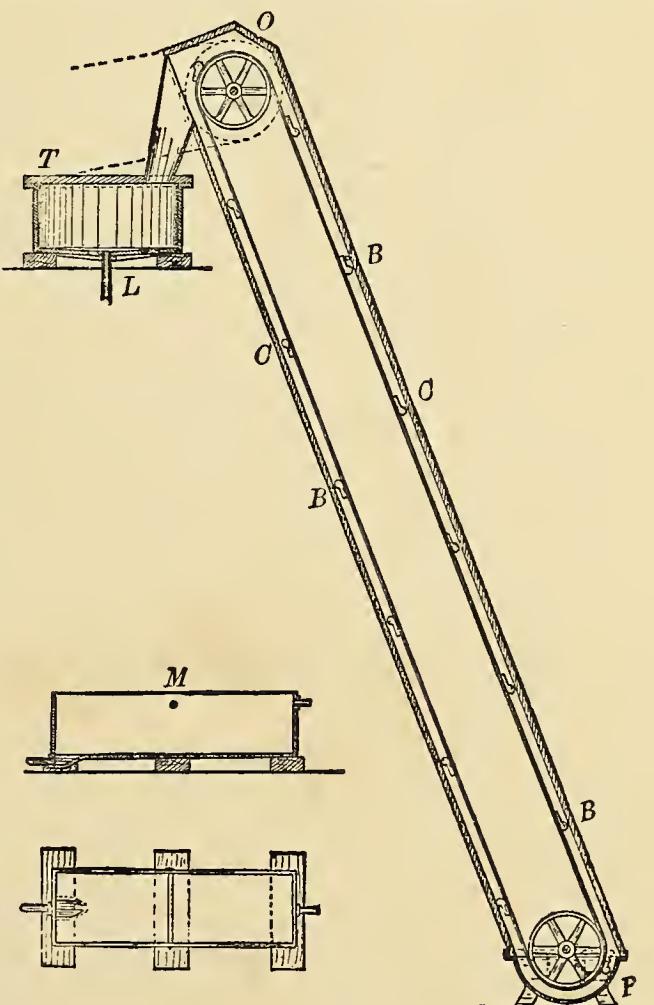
A.—QUICKSILVER ELEVATOR AND TANKS.
